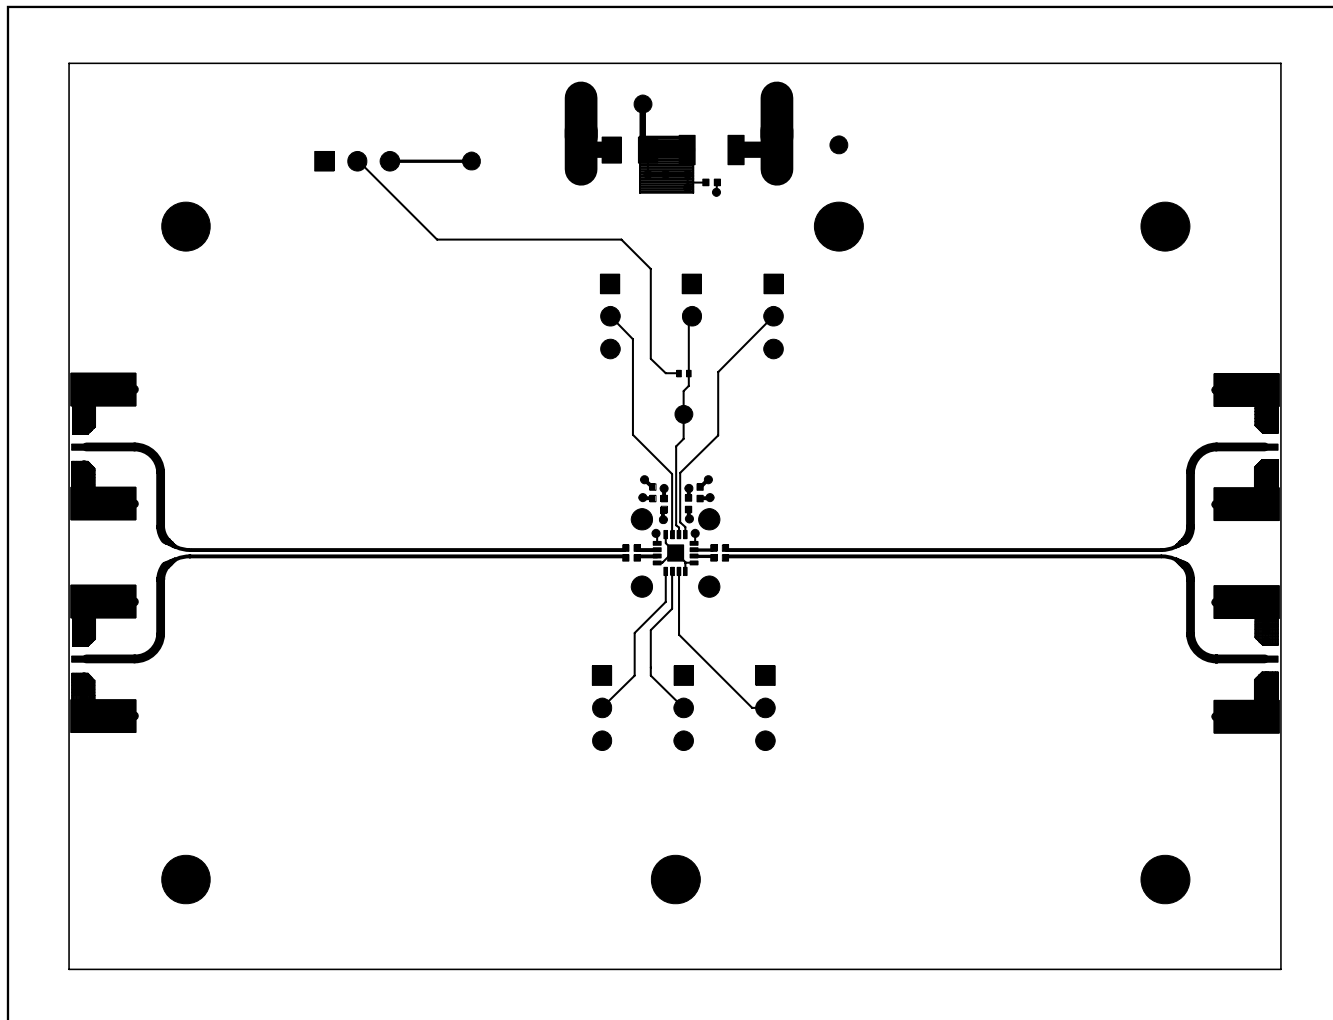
MAX3984 EV Kit PCB Layout—Component Side, Layer 1
